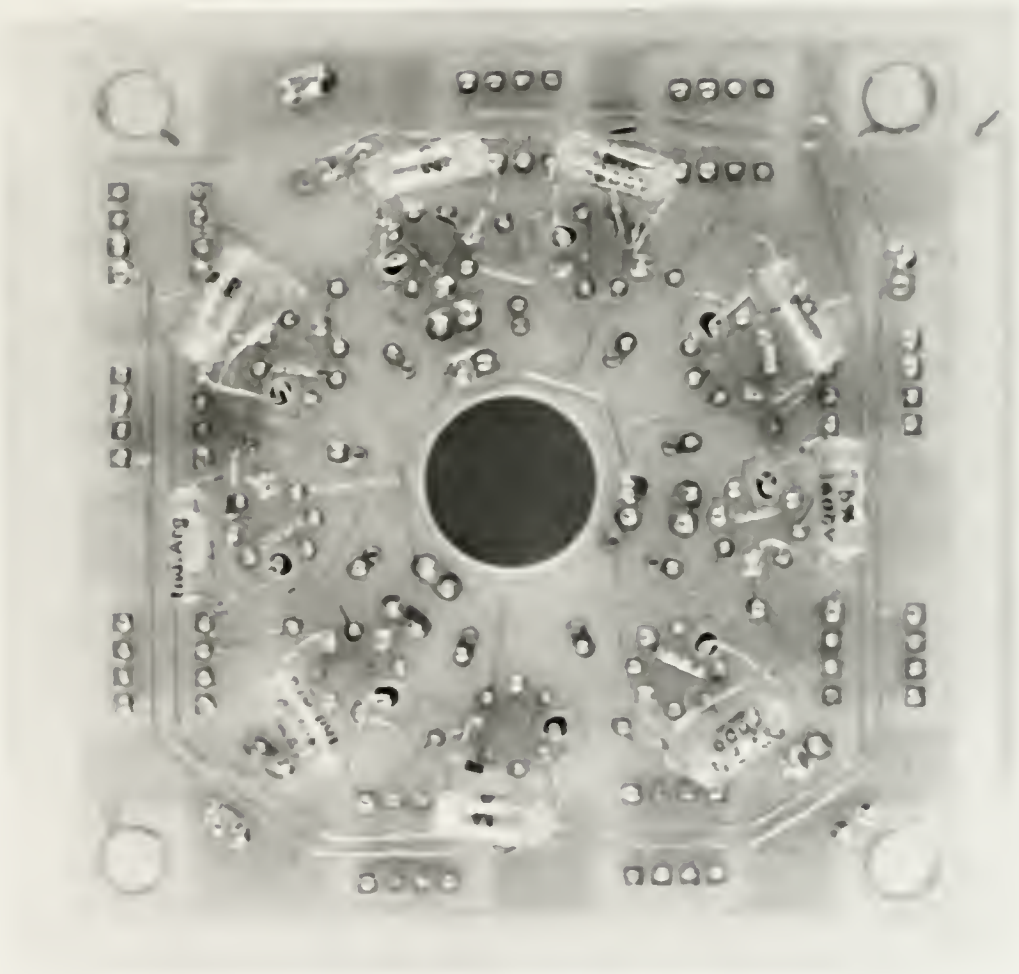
WIRING SIDE OF AMPLIFIER BOARD
